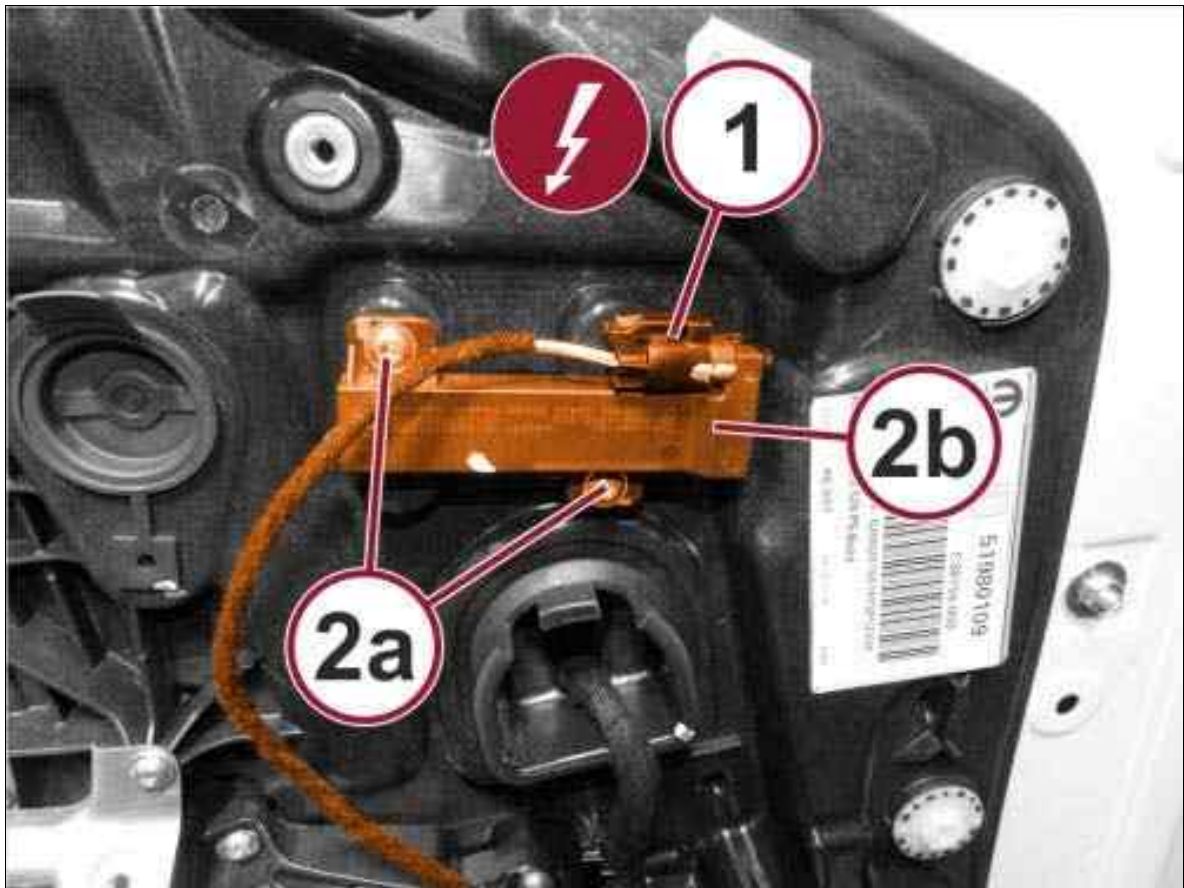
Inner Door Panel, Latches, Rods, Ends & Retainers
